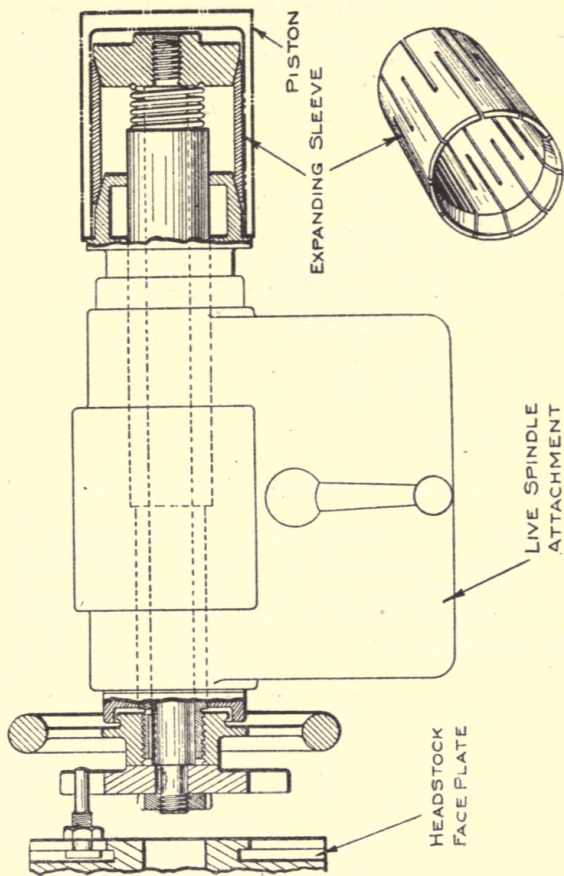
EXPANDING HOLDER ON LIVE SPINDLE
